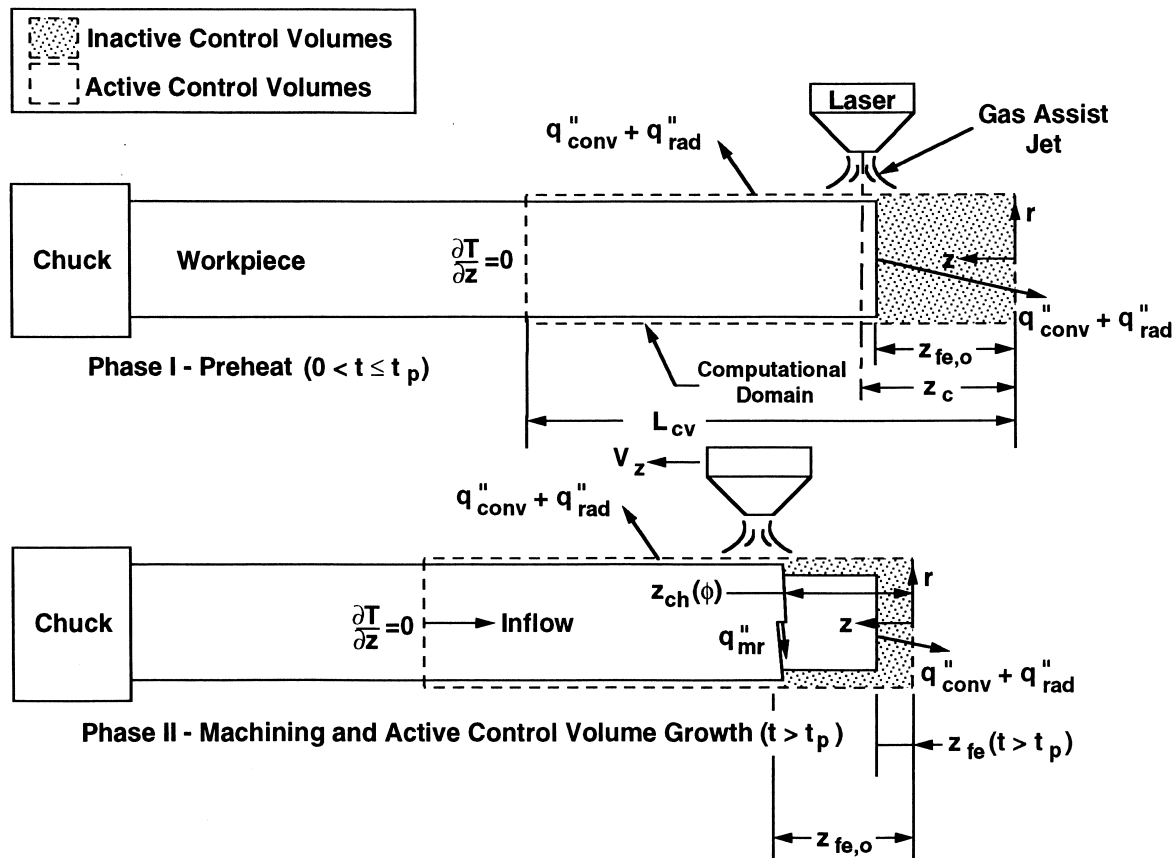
Schematic of the model for the transient calculation of laser heating on a rotating workpiece with preheating and machining.
